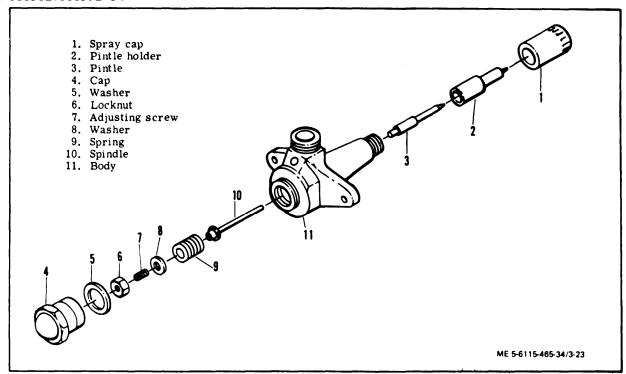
Fuel Injection Nozzle Holder, Exploded View
